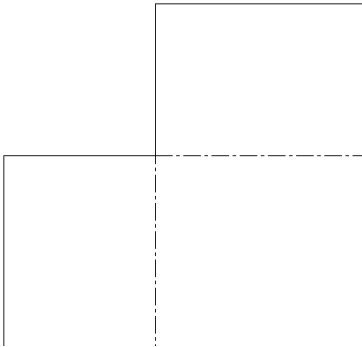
Flat pattern with the Corner Treatment check box selected
